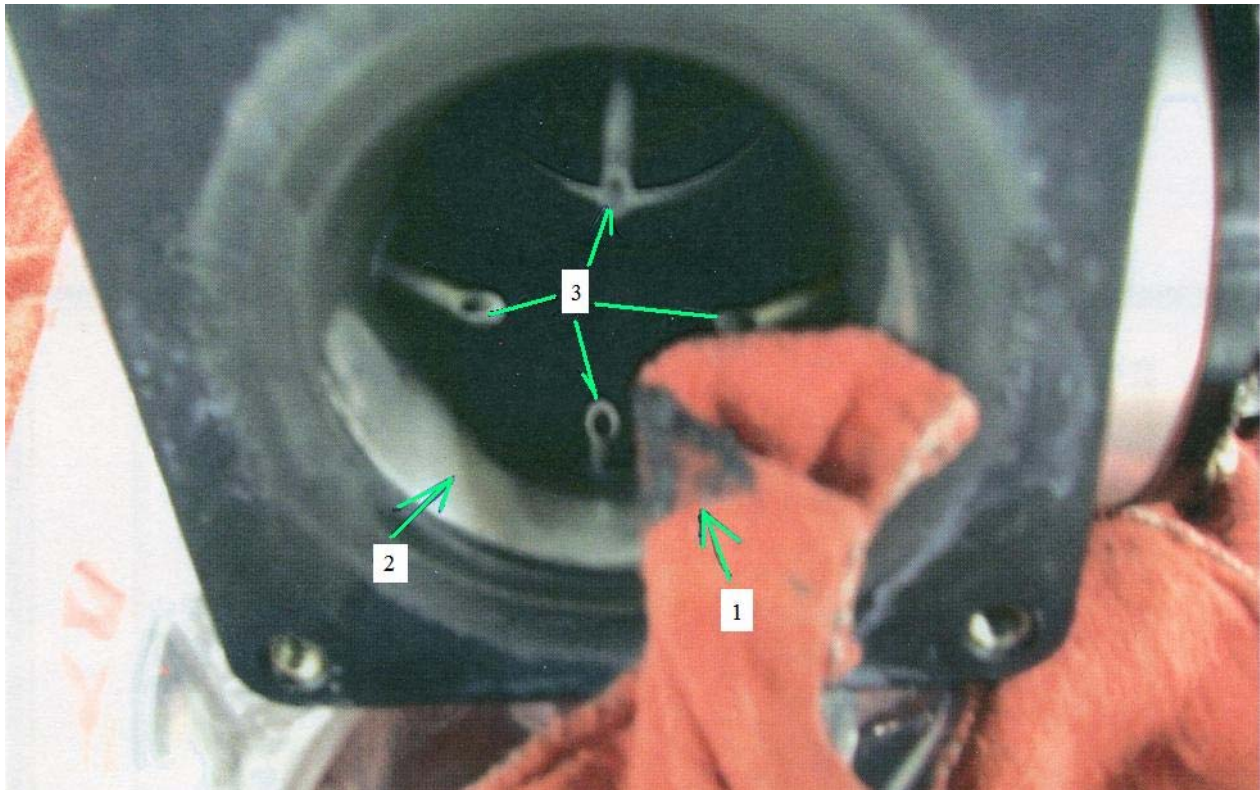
ENGINE FUEL AND CONTROL - INJECTOR AND AIR FILTER
